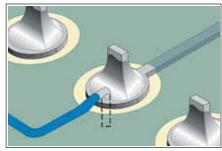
Acceptable* Wire soldered into plated-through hole on solder side.
